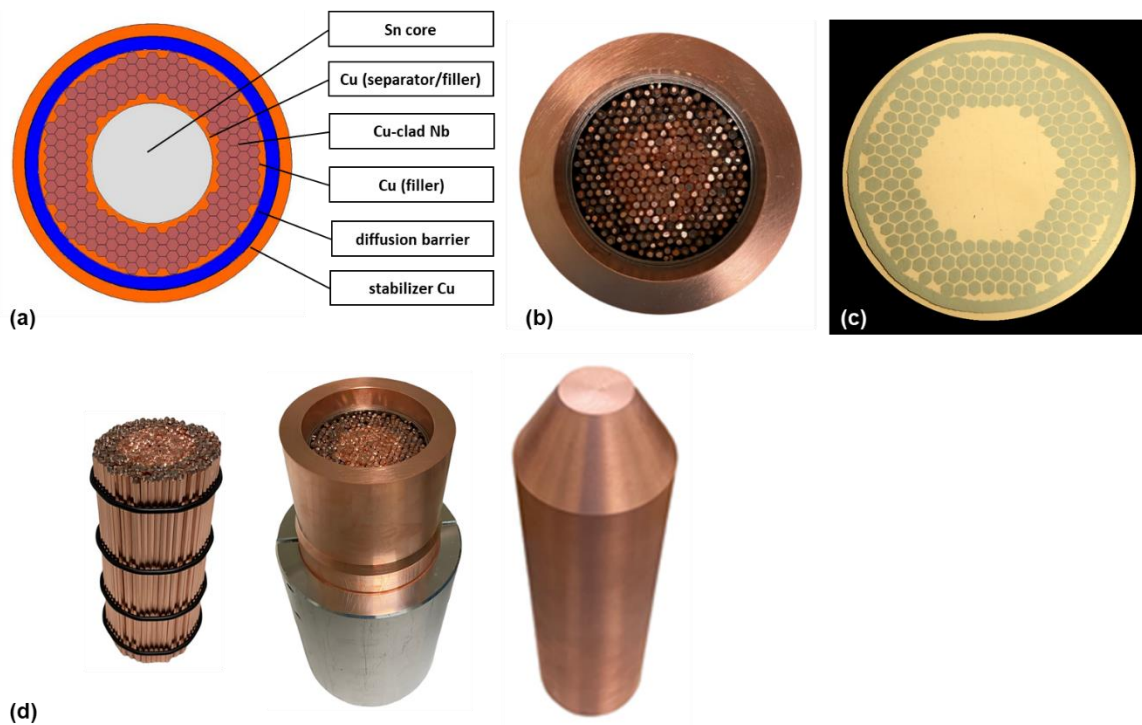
(a) Sub-element configuration used for the first series of prototype wires; (b) sub-element assembly for the extrusion billet with an outer diameter of 75 mm; (c) polished cross-section of the extruded rod at 19.8 mm prior to be gun drilled for Sn insertion; (d) different stages of the billet preparation.
